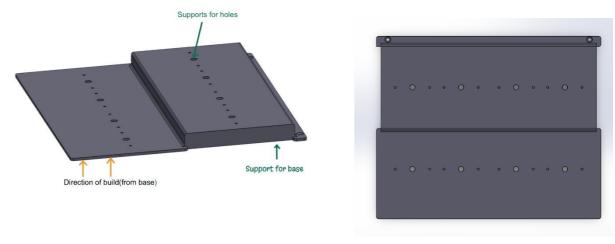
Isometric view of the part highlighting the direction of printing and holes that need to be supported.
